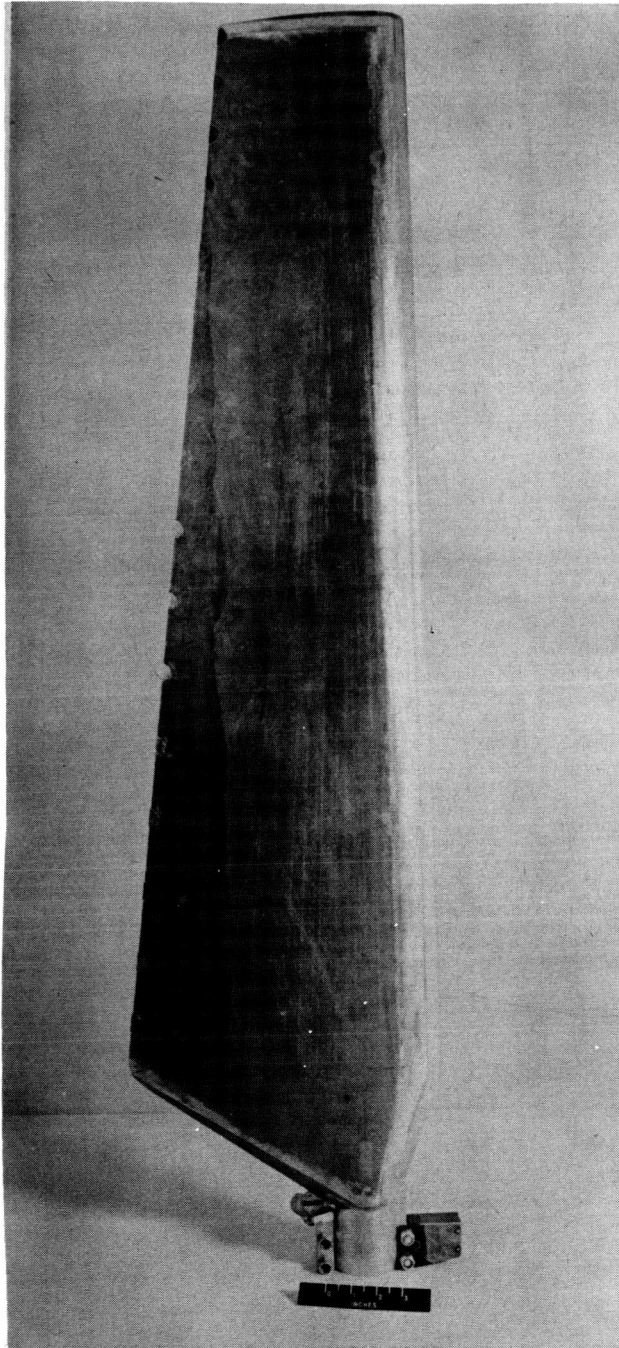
Components of rotor blade before final assembly. L-58-549a
